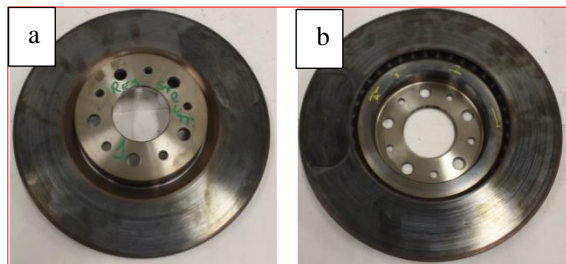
Rotors after crack tests. a. left, b. right.
